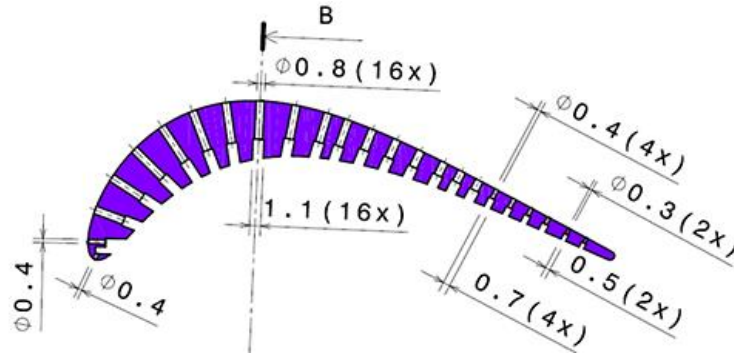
B-PNEU-SS pneumatic taps positioning and dimensions
